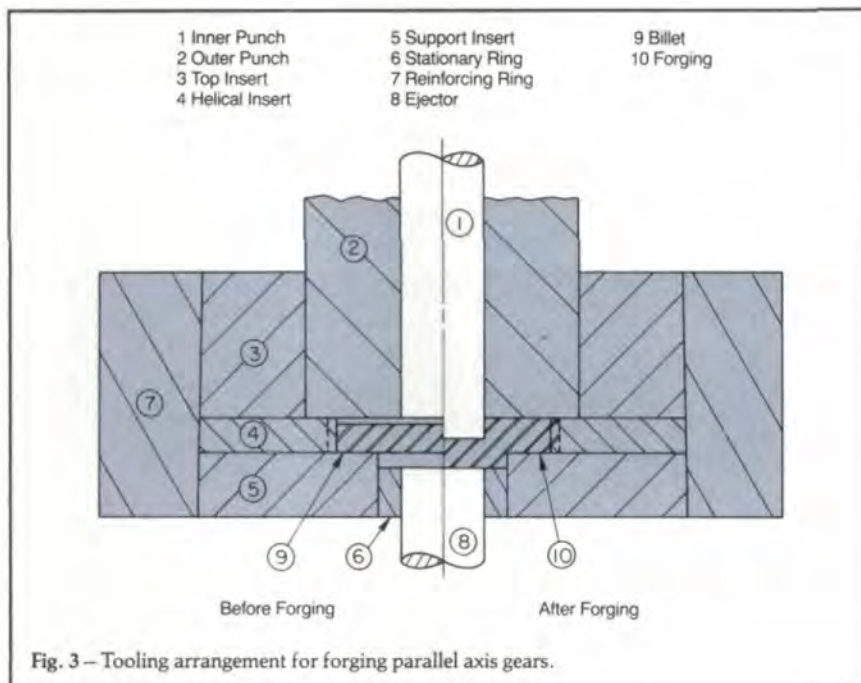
Tooling arrangement for forging parallel axis gears.
